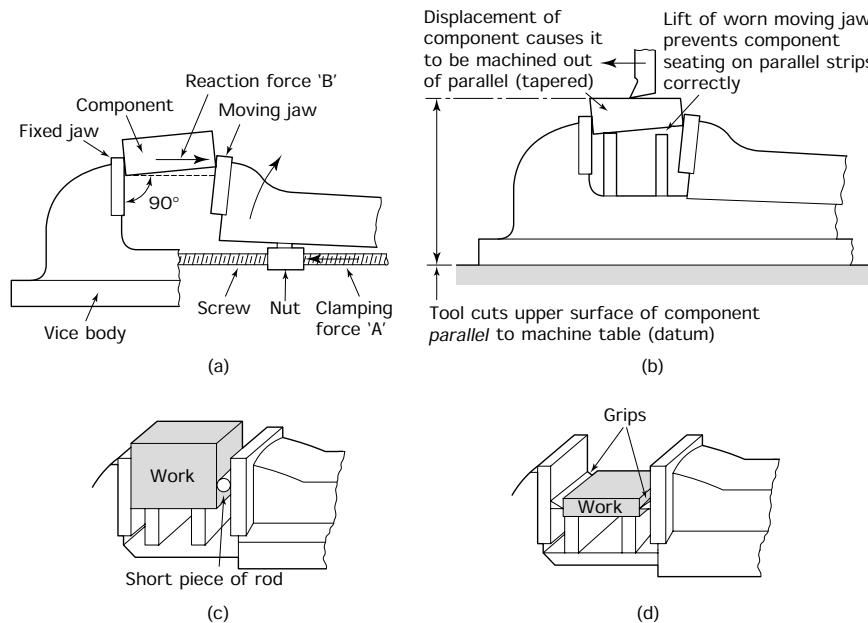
Effect of wear in a machine vice: (a) forces A and B form a 'couple' that tries to rotate the moving jaw; if the slides are worn the moving jaw will lift and displace the component being held, as shown; (b) lack of parallelism due to worn vice; (c) use of cylindrical packing; (d) use of grips
